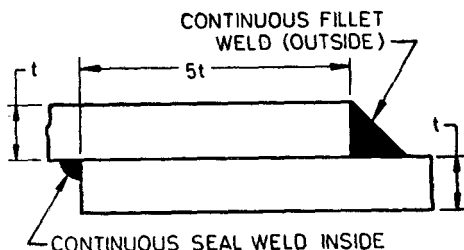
SINGLE FULL-FILLET AND SEAL LAP JOINT
